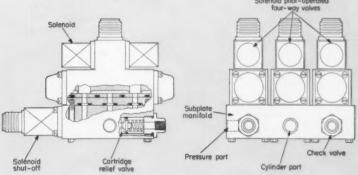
Three subplatemounted selector valves mounted on a manifold containing by-pass valves, a relief valve and a check valve. Subplate mounting, which is drilled for fluid passages, can be separated from the valves for test or replacement.
